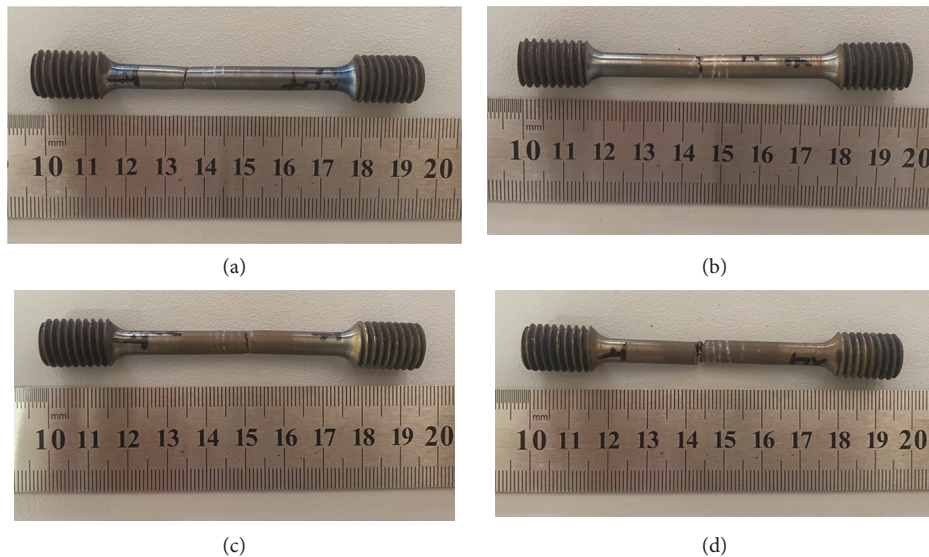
Appearance of fractured SSRT test specimens. (a) M-L7 at 750°C, (b) M-L6 at 800°C, (c) M-L4 at 850°C, (d) M-L1 at 900°C.
